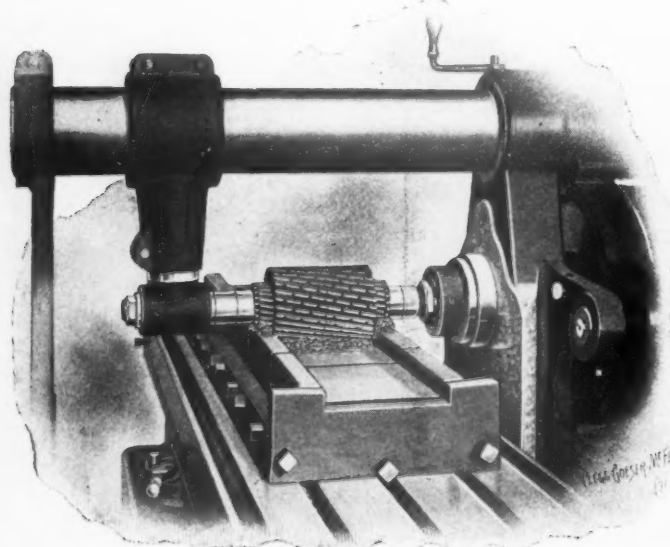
AN EXAMPLE OF RAPID MILLING.
